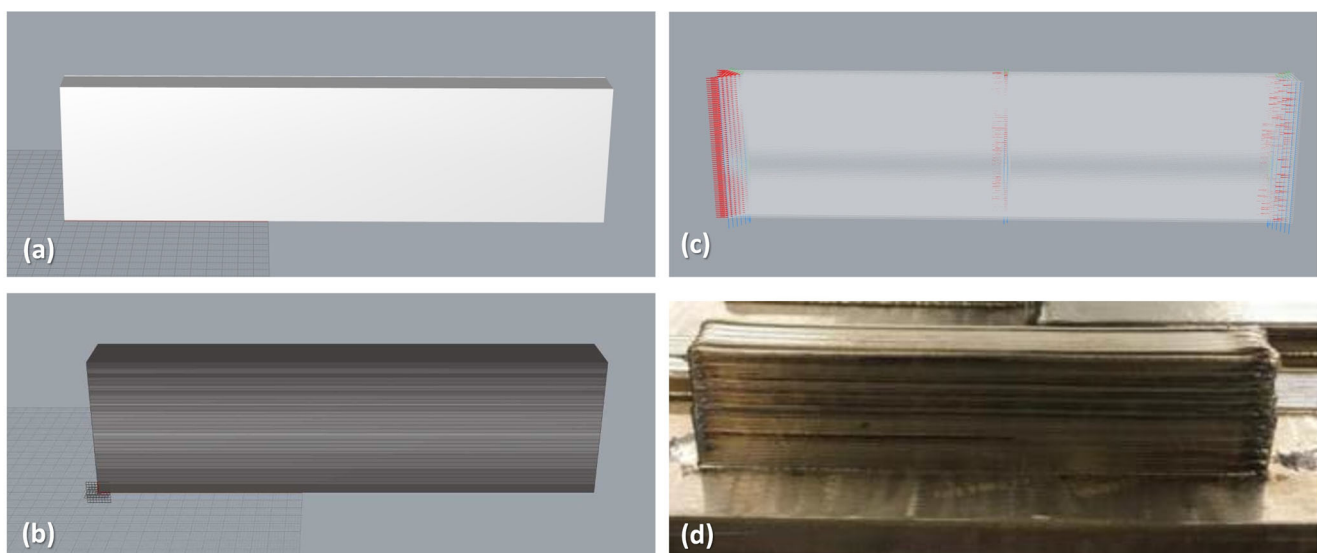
Case 1 (a) wall 3D model object, (b) wall pattern creation, (c) wall points creation, (d) printed metal wall output
